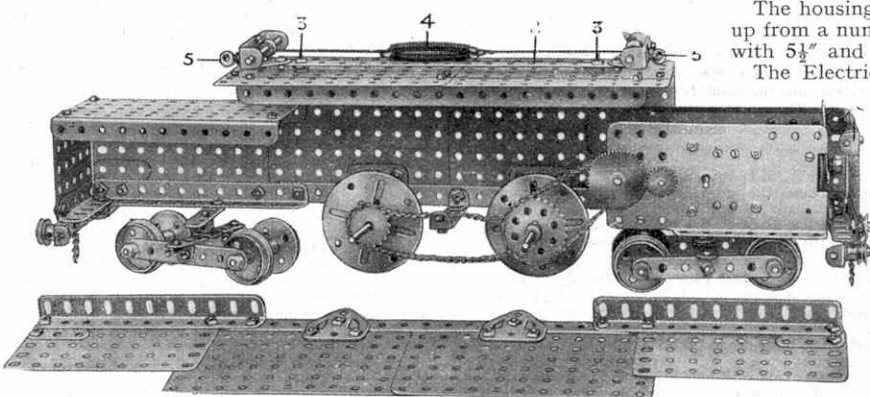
The Electric Locomotive partly dismantled to show assembly of drive transmission.
